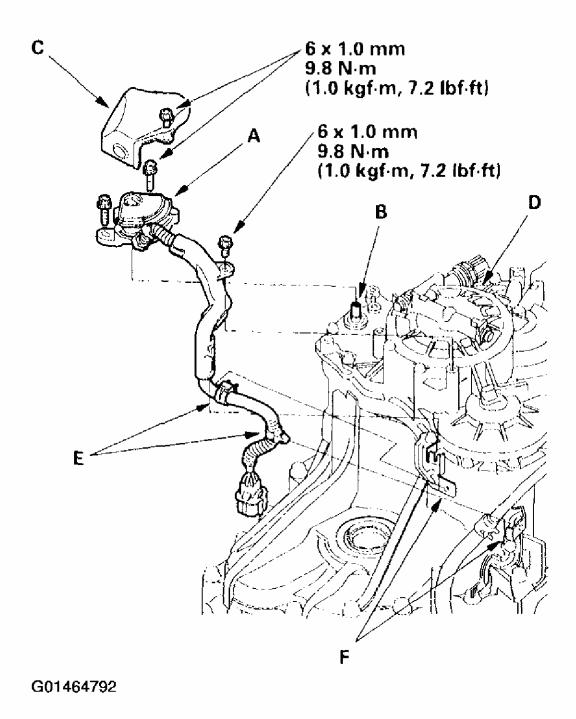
Installing The Transmission Range Switch Cover & Harness Clips Courtesy of AMERICAN HONDA MOTOR CO., INC.
